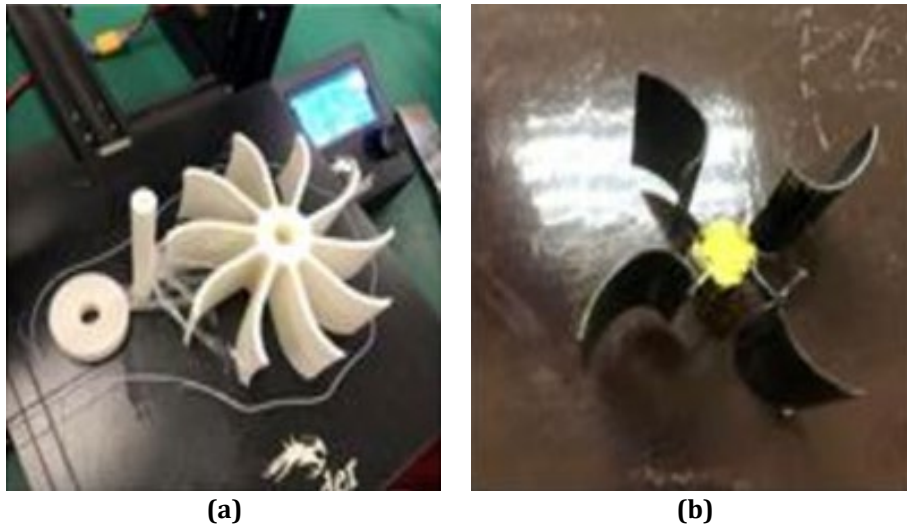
The types of blades (a) 3D printing using abs material; (b) Plastic material
